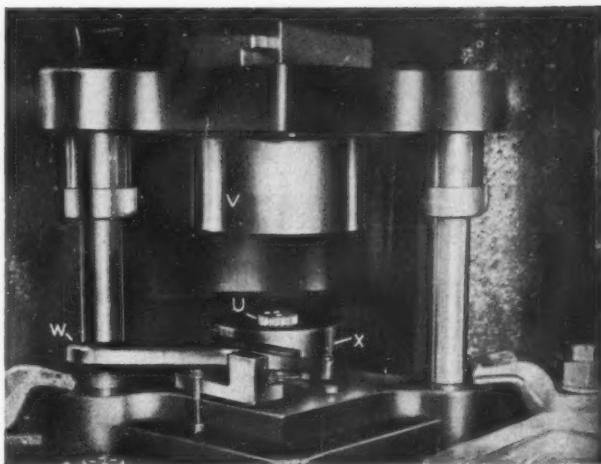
Close-up View of a Shaving Tool Set-up on a Bentley 30-ton Press for Finishing Gear Pressings. A Stripper Plate Surrounding the Shaving Punch in the Lower Tool is Actuated by the Lever at the Left
